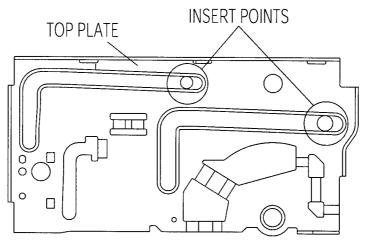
ASSEMBLY OF THE F/L ASS'Y
